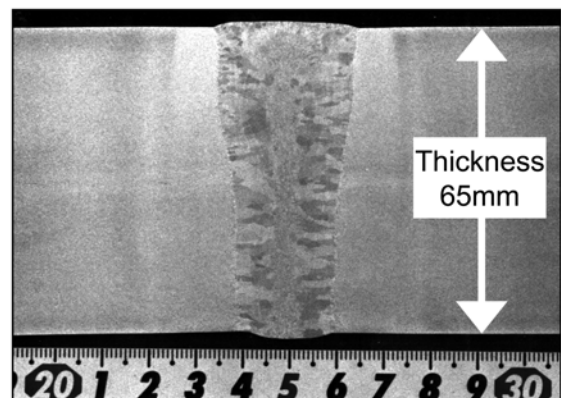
Cross section of the EGW weld of steel plates 65mm thick produced at a weld heat input of 60 kJ/mm.
